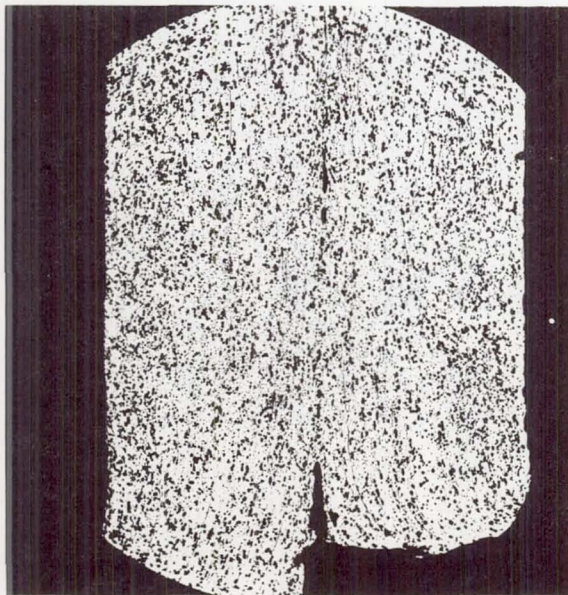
Higher Magnification Photo of Weld Shown in Figure 14
